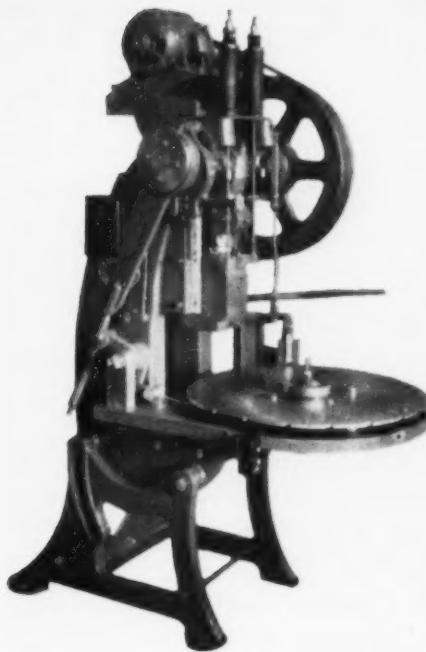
Inclined press equipped with spring counterbalanced ram slide and ratchet type safety dial feed. Illustration courtesy E. W. Bliss Company.
